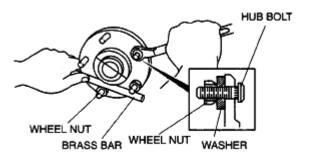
Removing Wheel Hub Bolt Courtesy of MAZDA MOTORS CORP.
